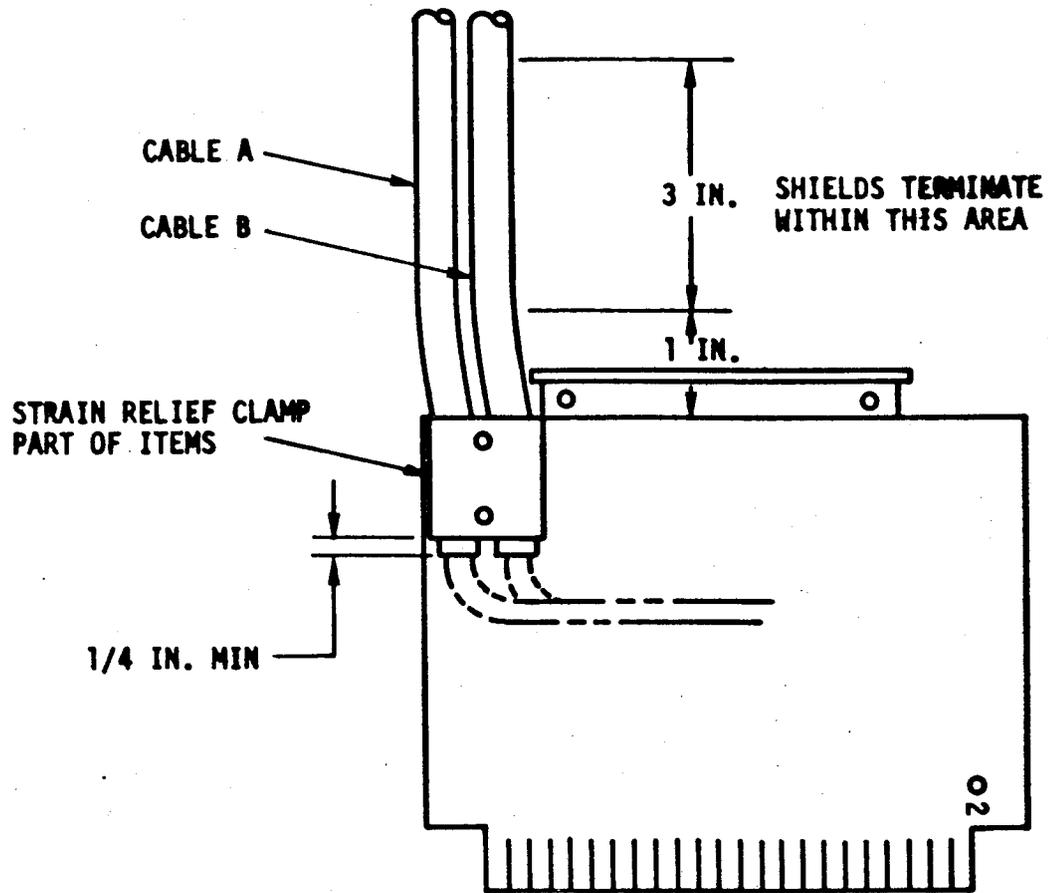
Shield Terminations, Type E Cables (PC Boards)
